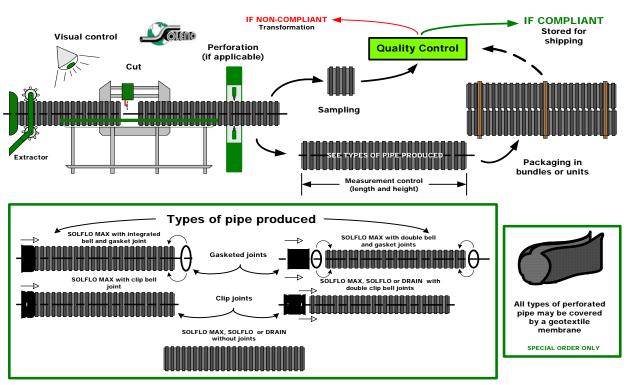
Dual wall and single wall finishing and packaging of sections
